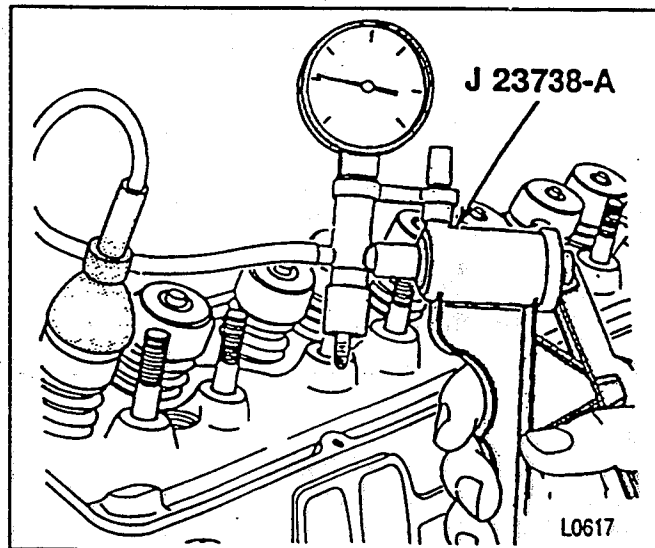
Checking the Valve Seal (5.0L and 5.7L Engines)
